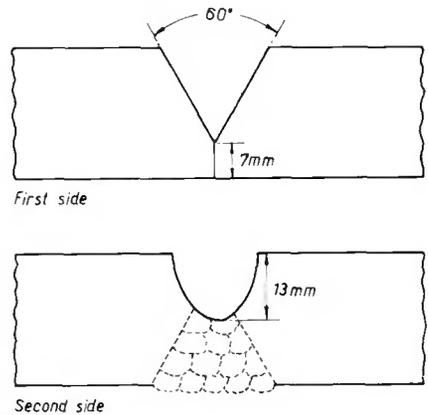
Joint dimensions for welds in HY130 steel
